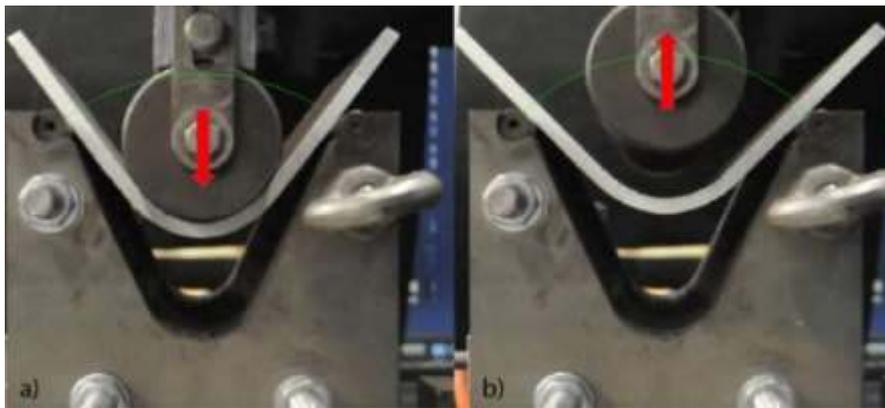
Bending of a steel plate in a V-die: a) punch in lower position; b) punch released
